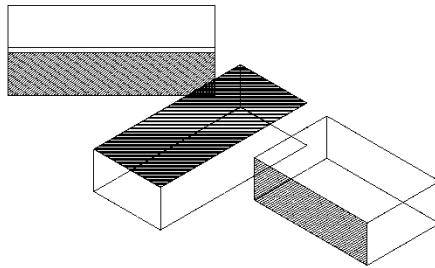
Section cuts and planes taken from the gauge section of the test specimens
